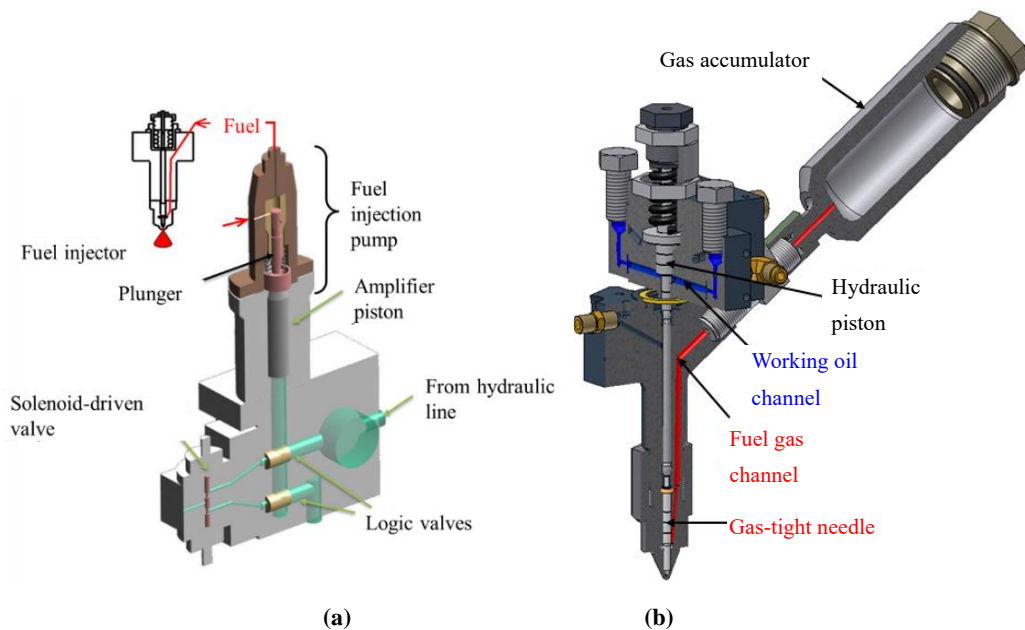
The injectors details a) diesel injector, b) gas injector
